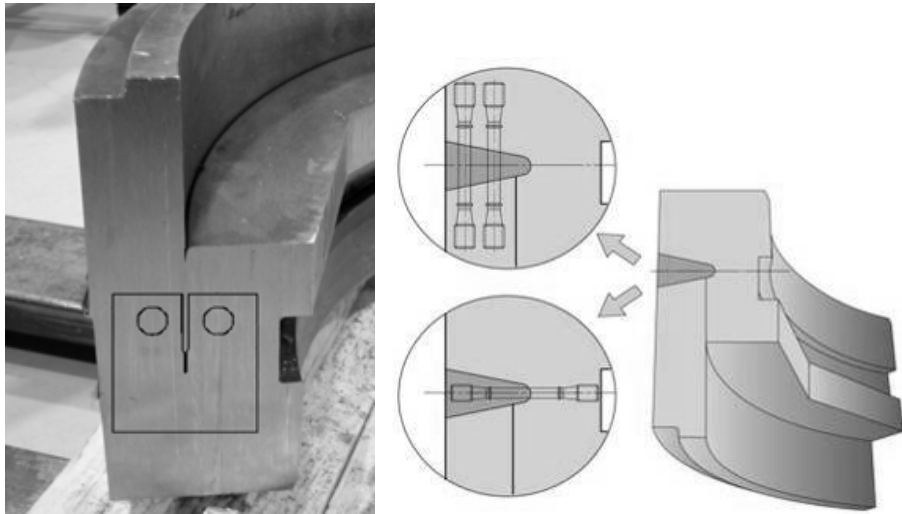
Extraction of a) compact tension (CT) specimens and b) uniaxial cross-weld specimens from a section of a welded (FSW) copper overpack.
